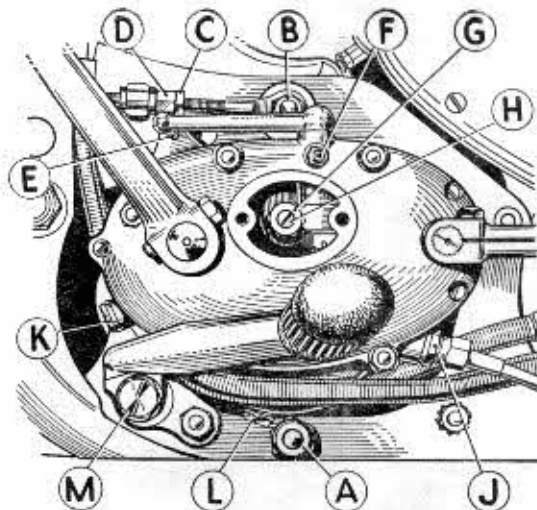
CLUTCH AND FRONT CHAIN ADJUSTMENT (Swinging arm models only).
